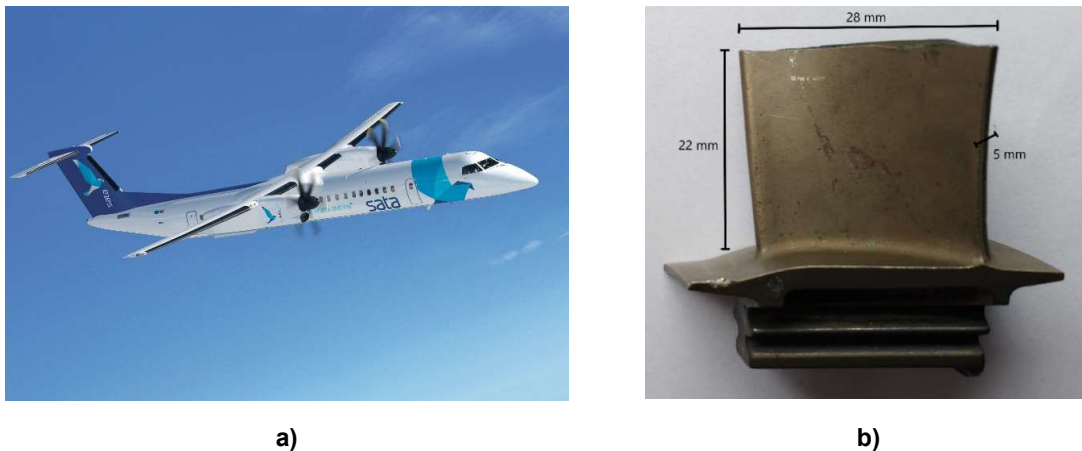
a) Bombardier DHC8-400 [31]; b) Discarded turbine blade dimensions
